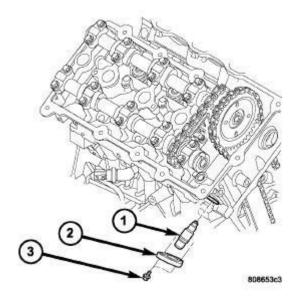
PRIMARY TIMING CHAIN TENSIONER Courtesy of CHRYSLER LLC
